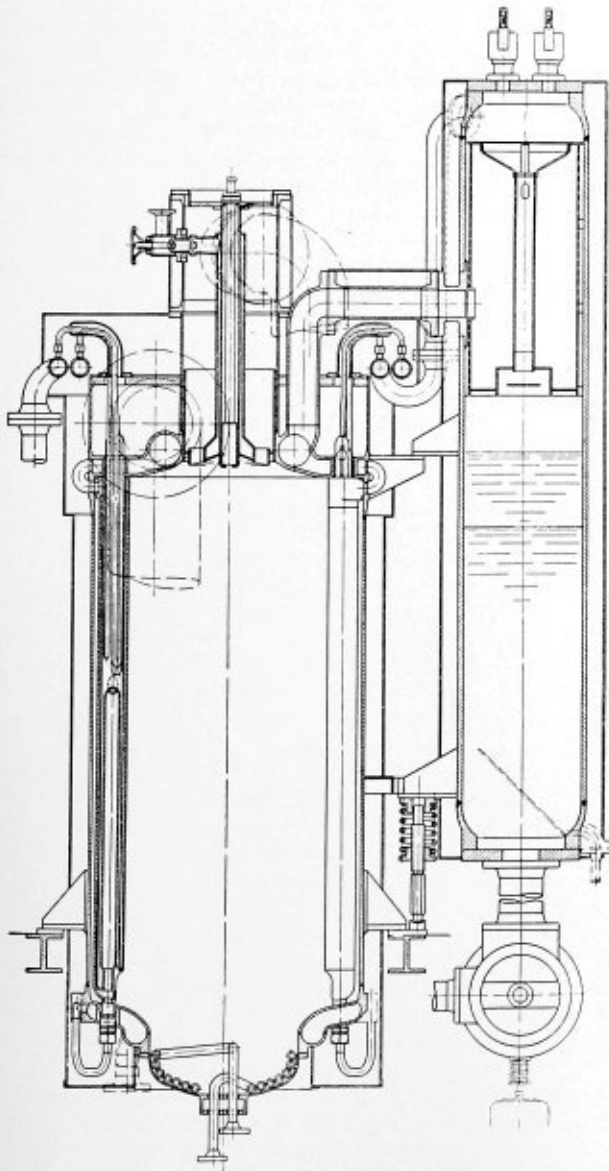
Section through Velox steam-generator with superheater tubes built into evaporator tubes and a burner for oil and gas firing
